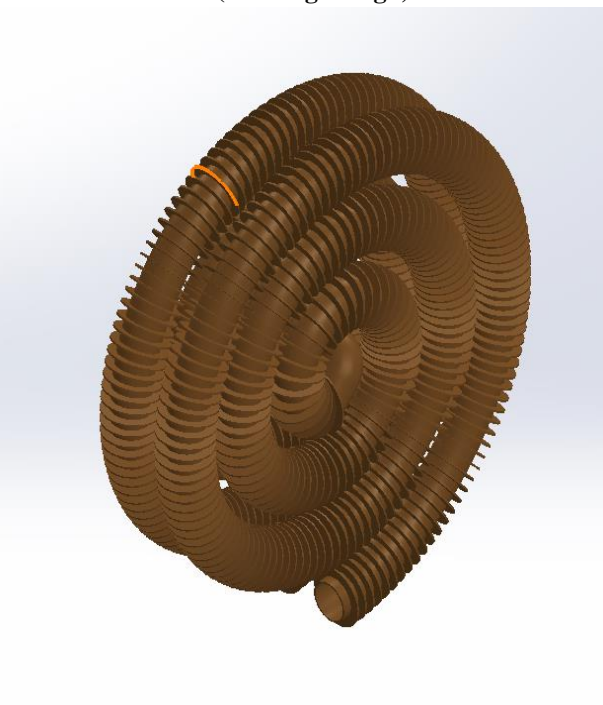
3D CAD Model of Spiral Shaped Radiator: (New Design)
